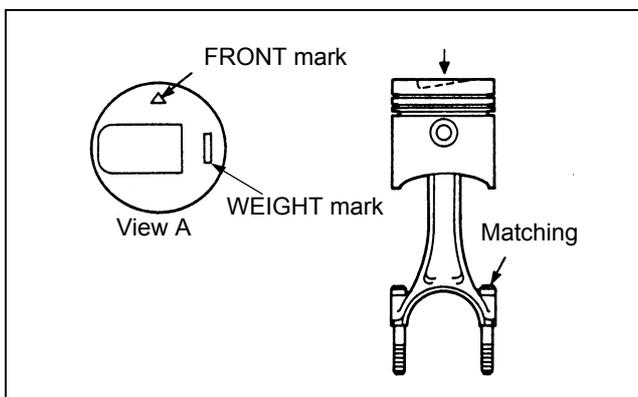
Assembling piston and connecting rod (swirl chamber type)
